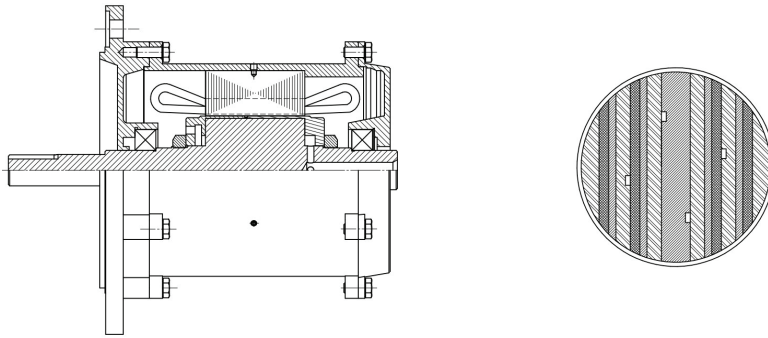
Assembly of the motor (a) and cross-section of rotor (b)
